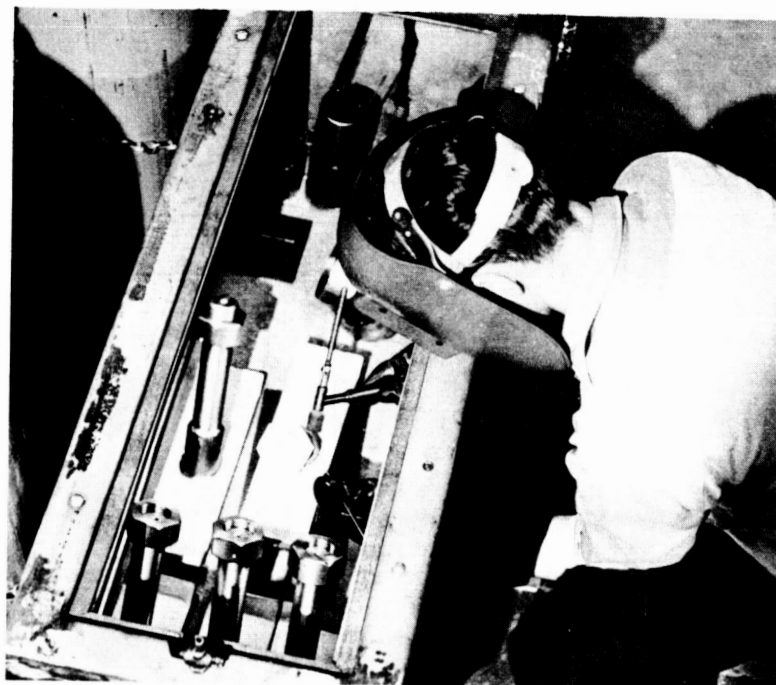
TANK-TYPE CONTROLLED-ATMOSPHERE WELDING CHAMBER (REF. 18)
